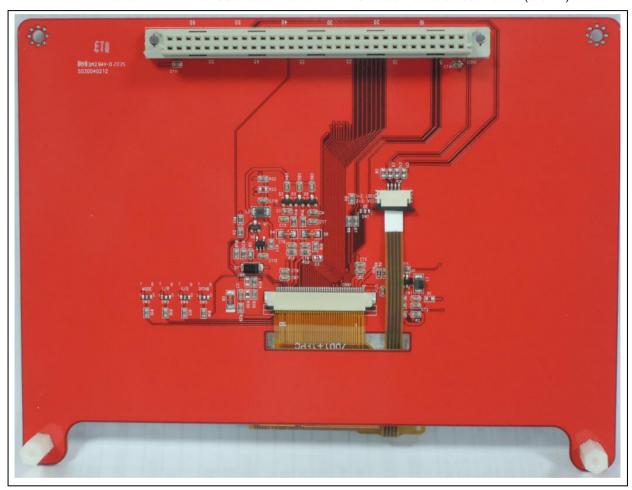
NuMaker-TFT-LCD7 Board (Rear View)
